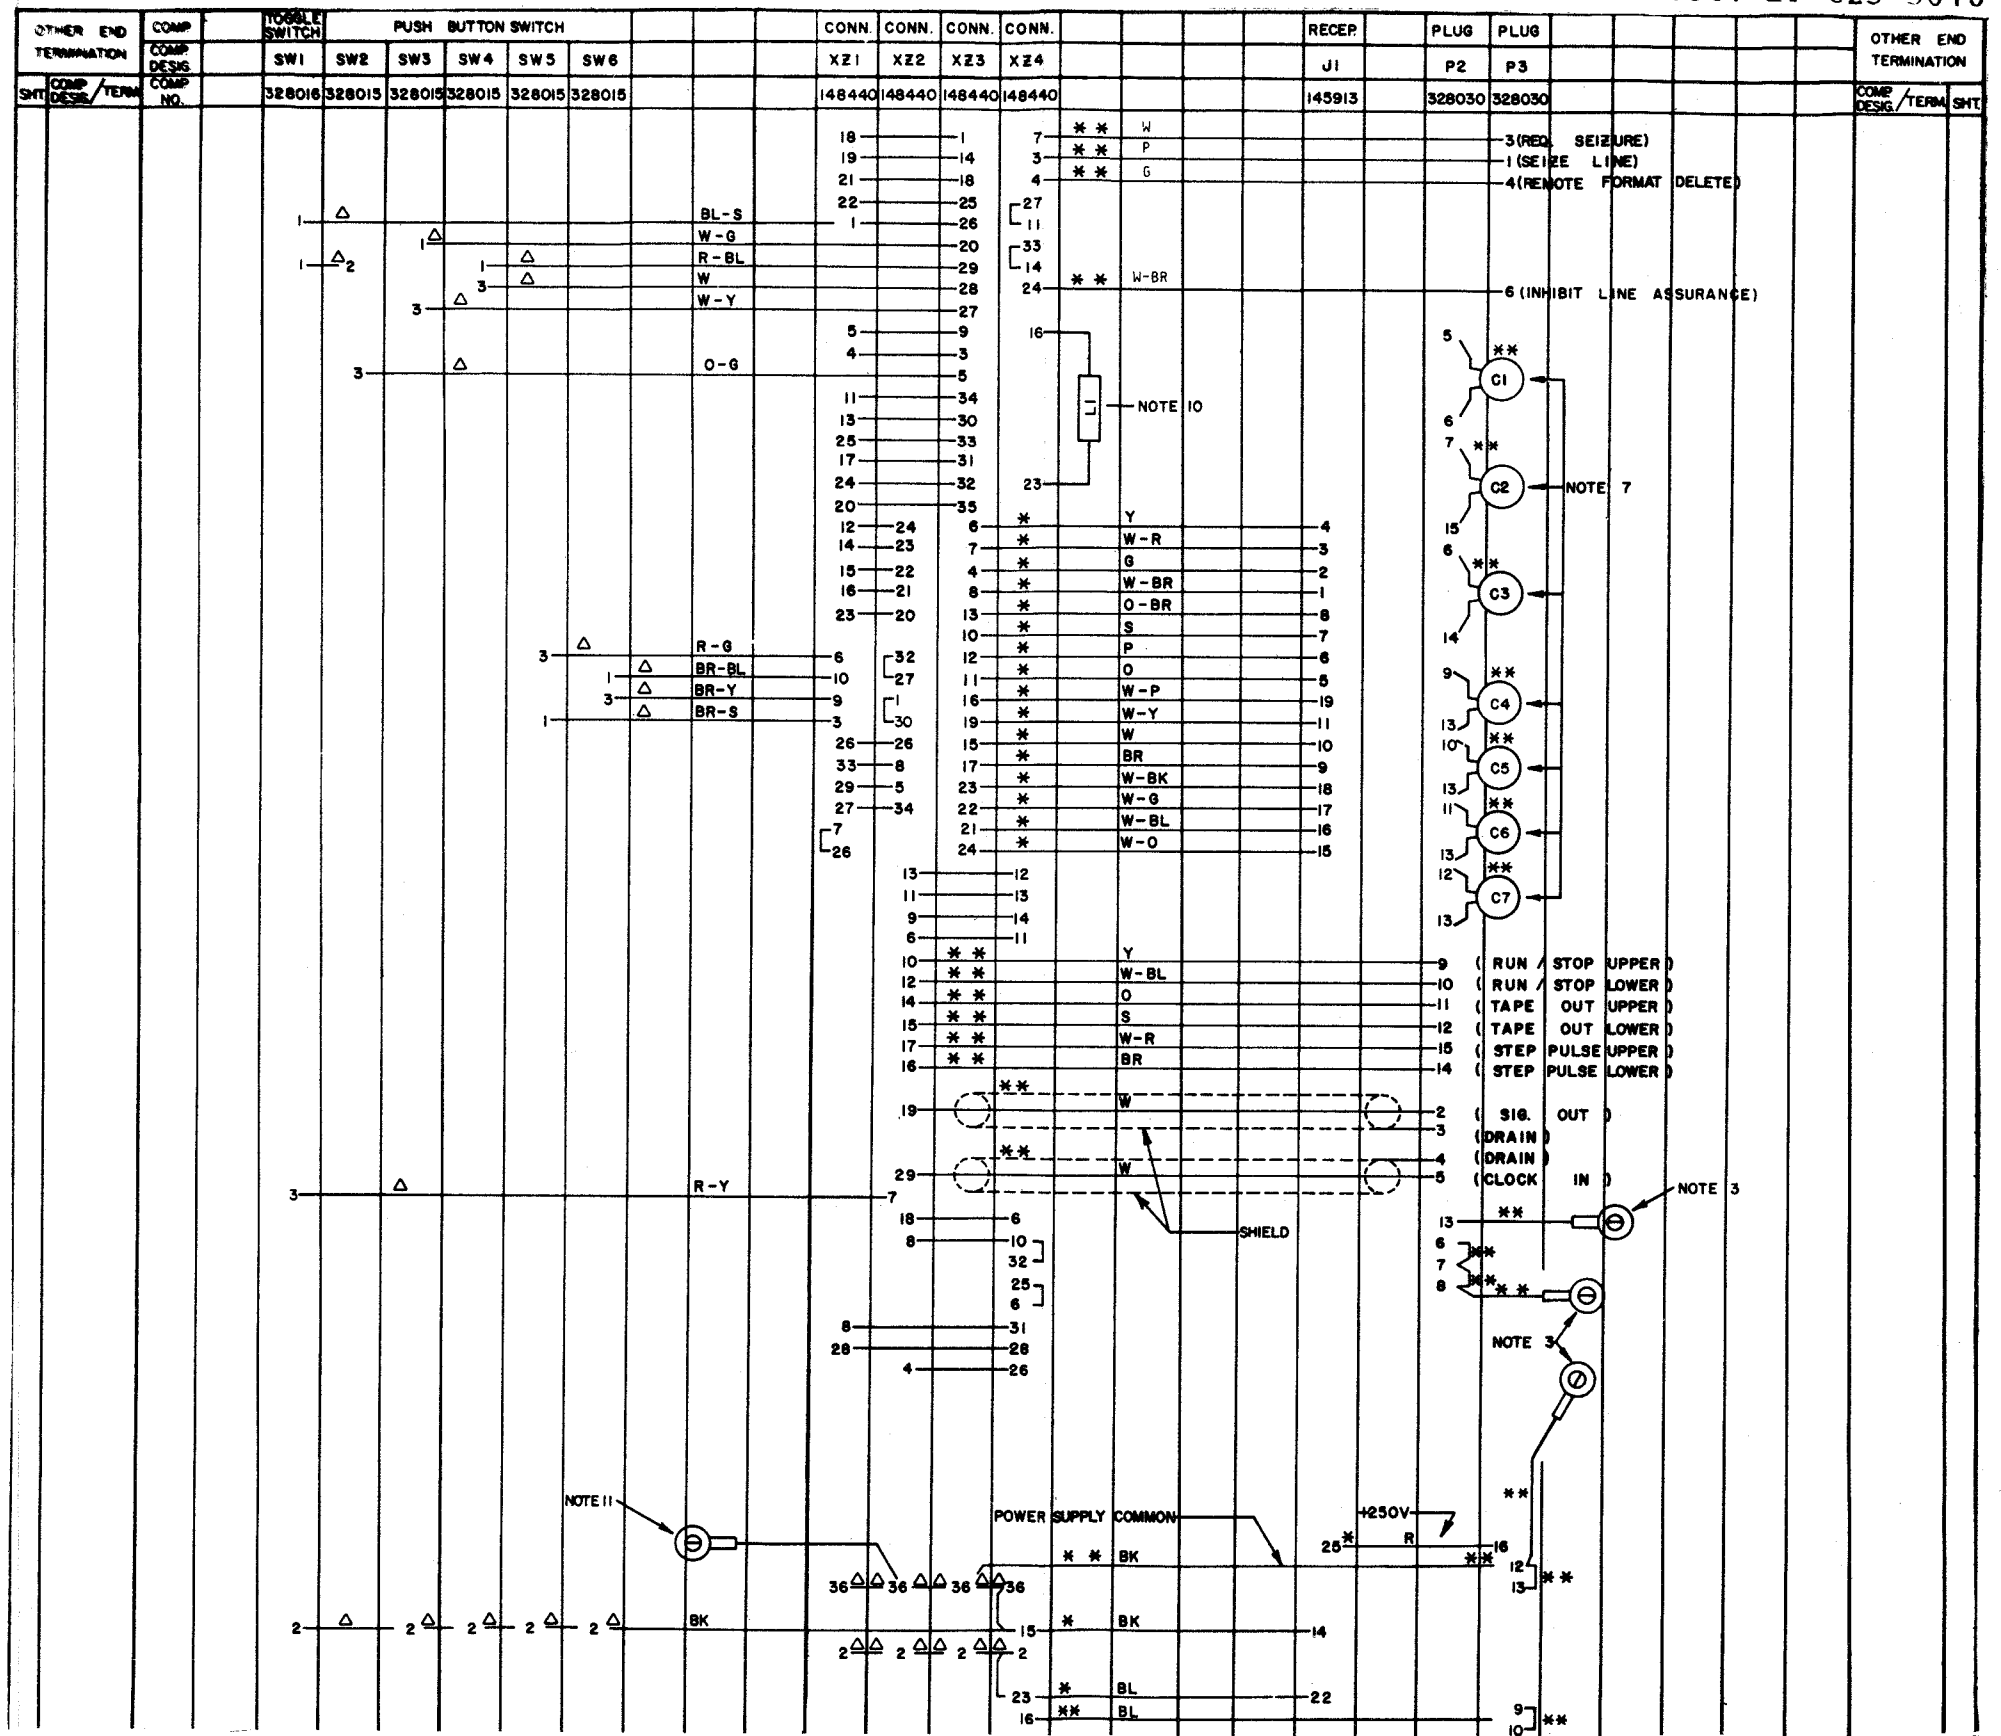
328010 and 328000 Electronic Message Numbering Module Wiring Diagram (Sheet 1 of 2)
